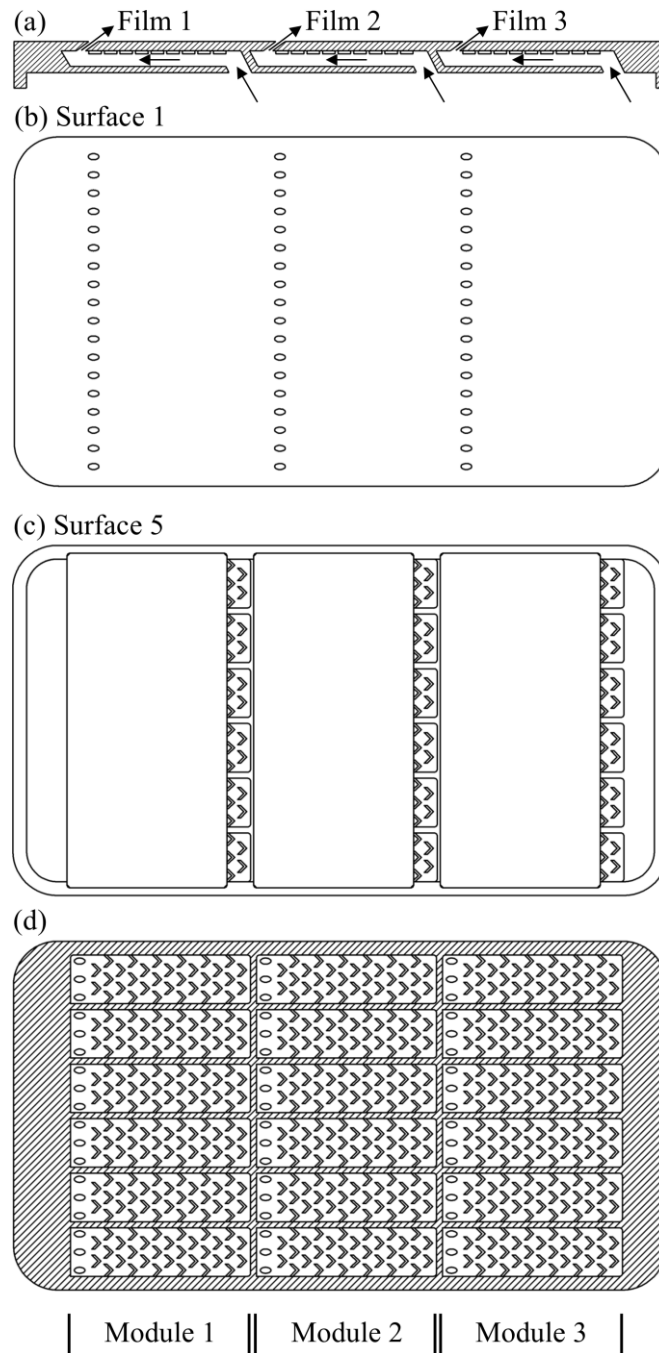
(a) drawing of flat-plate cross-section; (b) drawing of flat-plate external wall; (c) drawing of flat-plate internal wall; and (d) drawing of flat-plate internal surface showing ribs.
